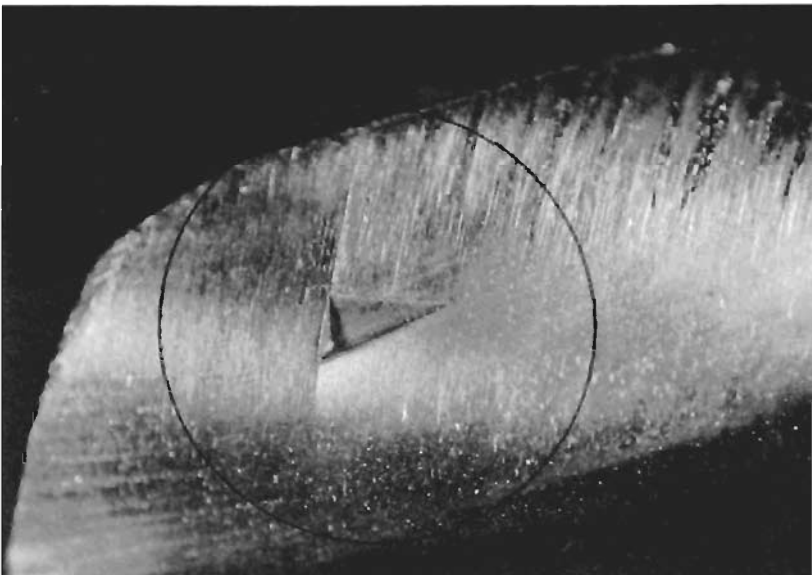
Spiral bevel gear tooth, 3 \times , showing surface gouge due to the breaking of a cutter blade.
